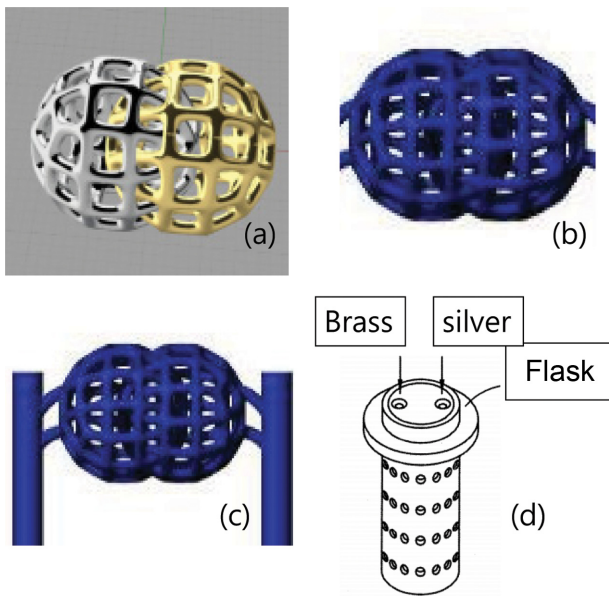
Dissimilar metal jewelry fabrication methods: (a) Modeling by CAD (b) printing a wax (resin) through 3D printer (c) wax tree production (d) casting.
